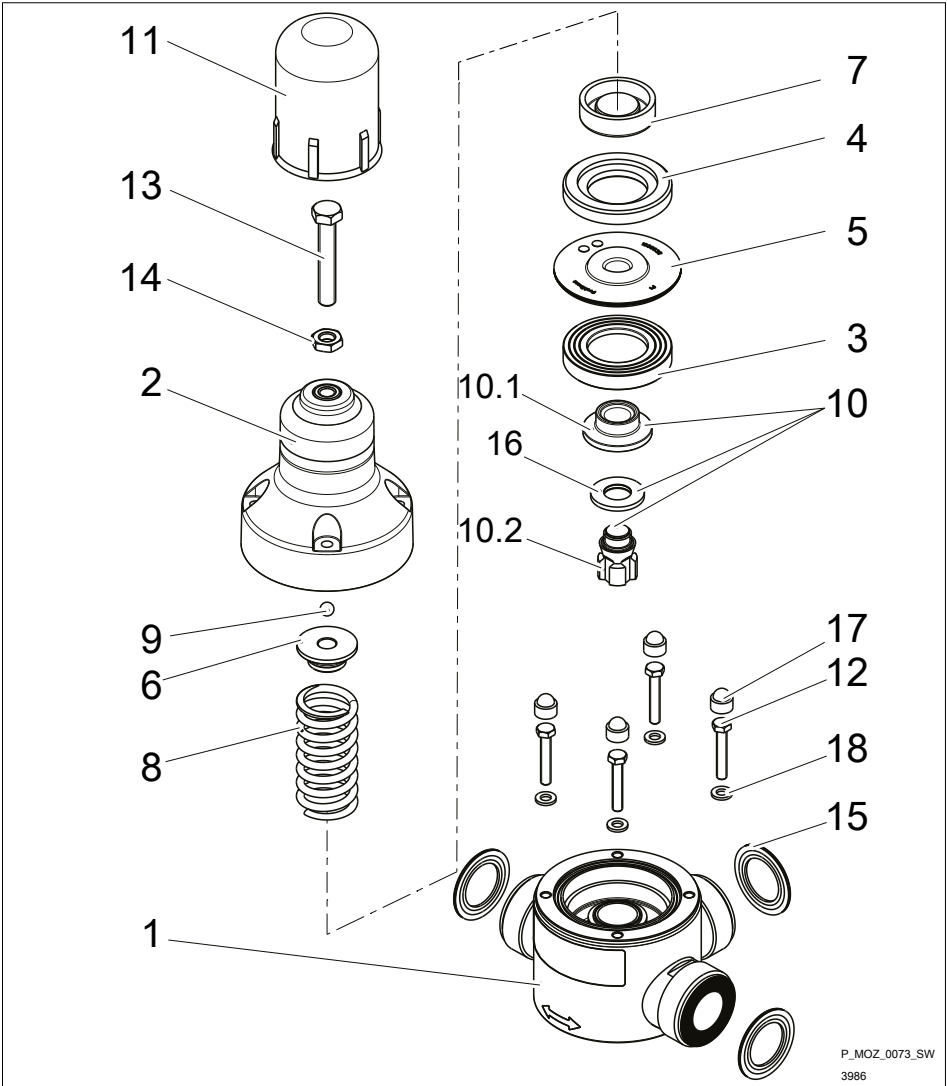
Exploded view drawing of DHV-UR PP_, PC_, PV
